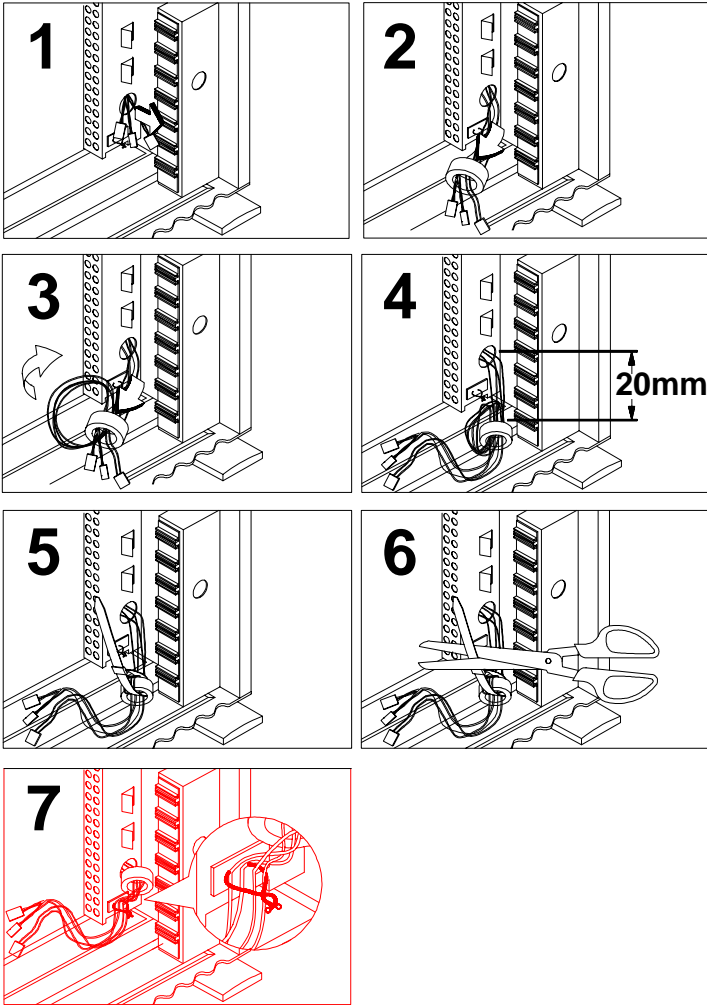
25 LED Cables and Power Switch Cable Install Diagram
